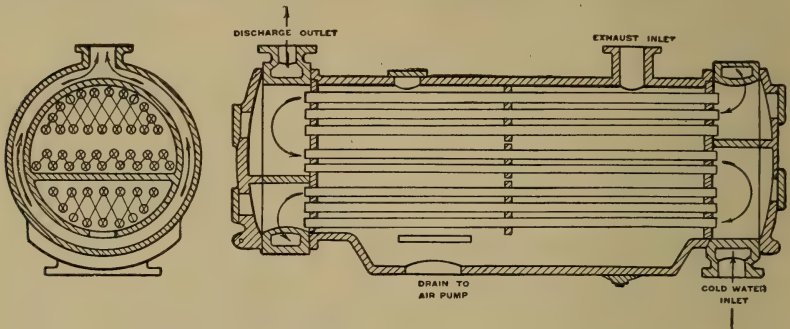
Surface-Condenser, C. H. Wheeler & Co.
